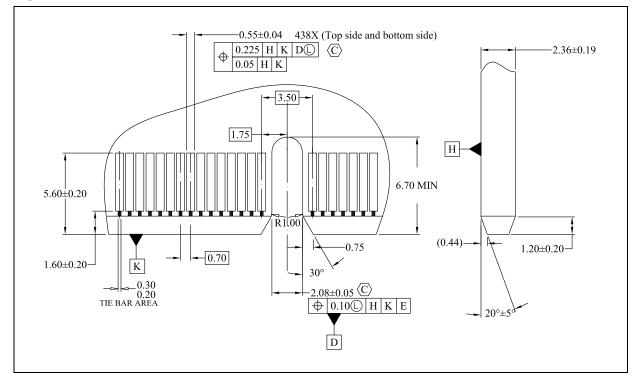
PCI e 3.0 Riser Card Dimensions (Detail A)
